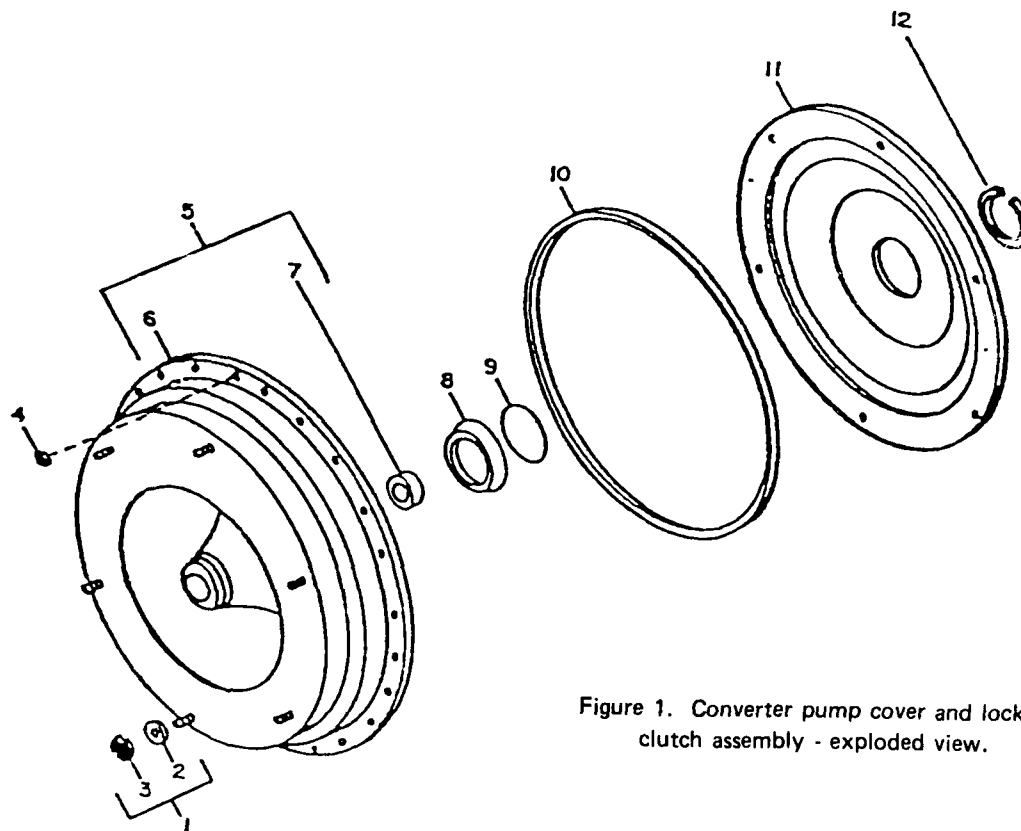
Converter pump cover and lockup clutch assembly - exploded view.
